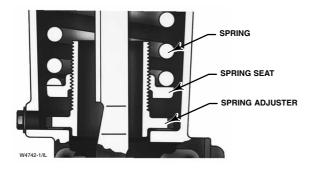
Typical Type 1052 Actuator Adjustable Spring Seat
